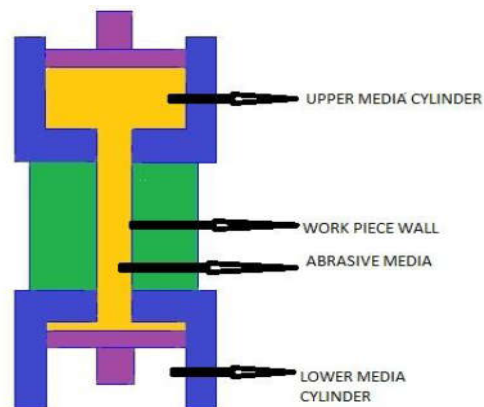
Abrasive Flow Machining Process, [WAS2014]
